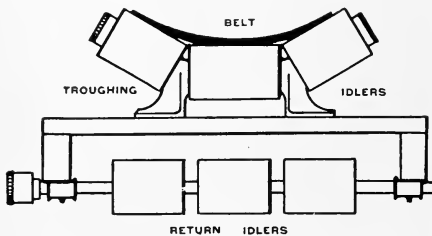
Guide Pulleys, Robins Belt Conveyor.
